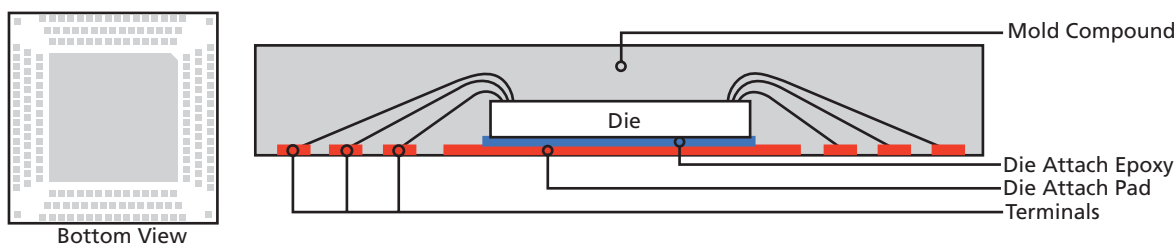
• Bottom View and Cross Section of Three-Row QFN
